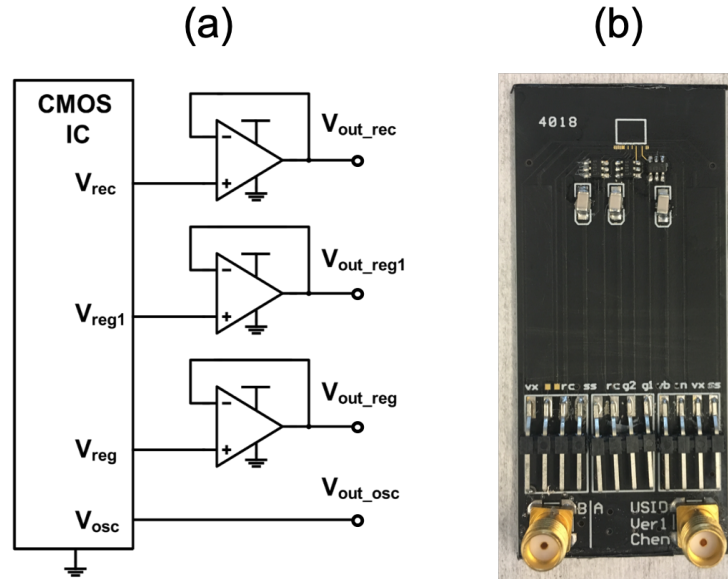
(a) The schematic of the testing board; (b) a populated testing board.
